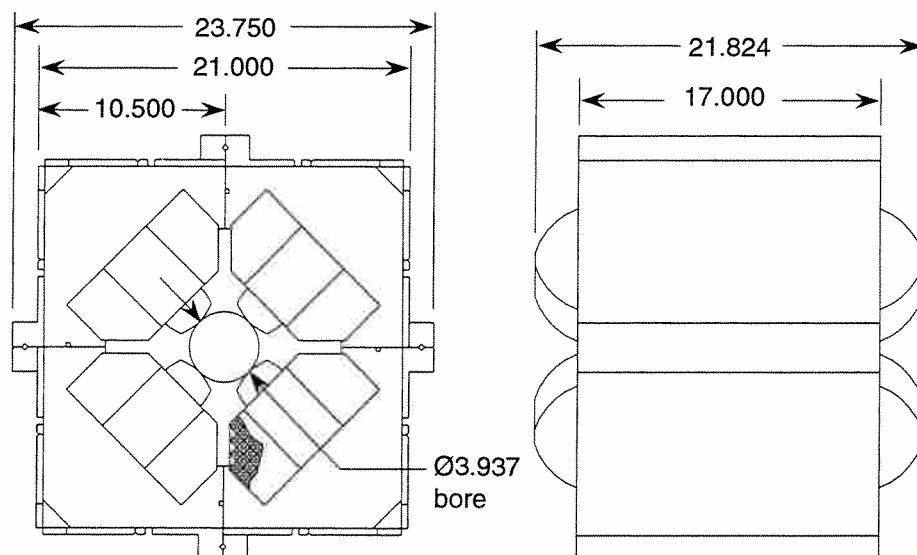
End and side views of an LER quadrupole magnet. Dimensions are given in inches.
